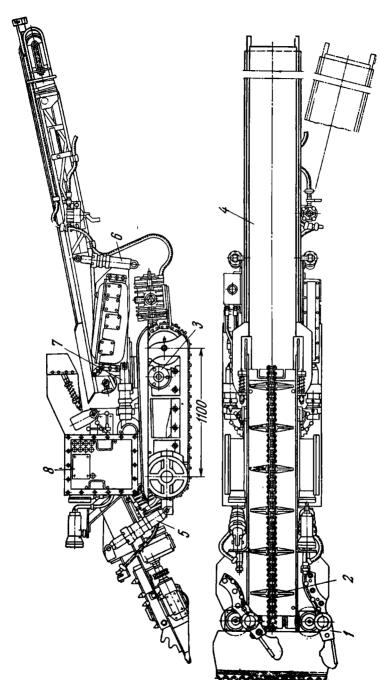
ГНЛ-30м (GNL-30m) coal loading machine
